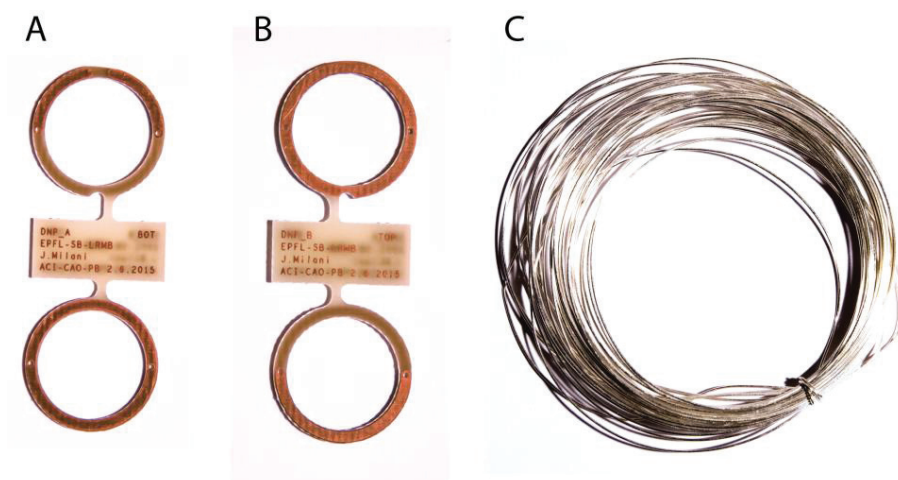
To guarantee the exact perpendicularity of the two circuits, external coils are made using PCB. A and B show the two sides of the PCB plate. The assembly is completed with copper wire coated with silver to prevent oxydation (C).
